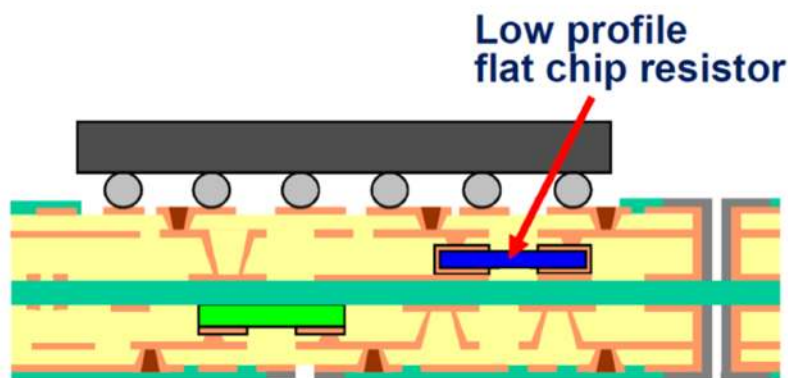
Inserted resistors in printed circuit board – source KOA Speer Electronics Inc. [6]
